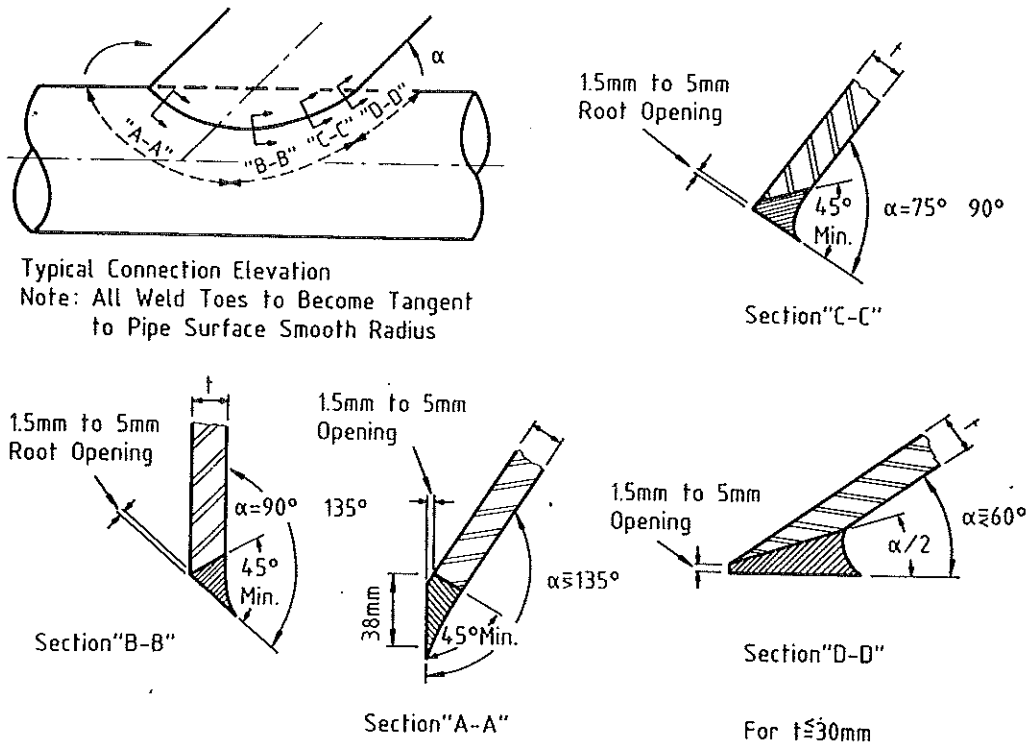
WELDED TUBULAR JOINT (After Wintermark, 2)
